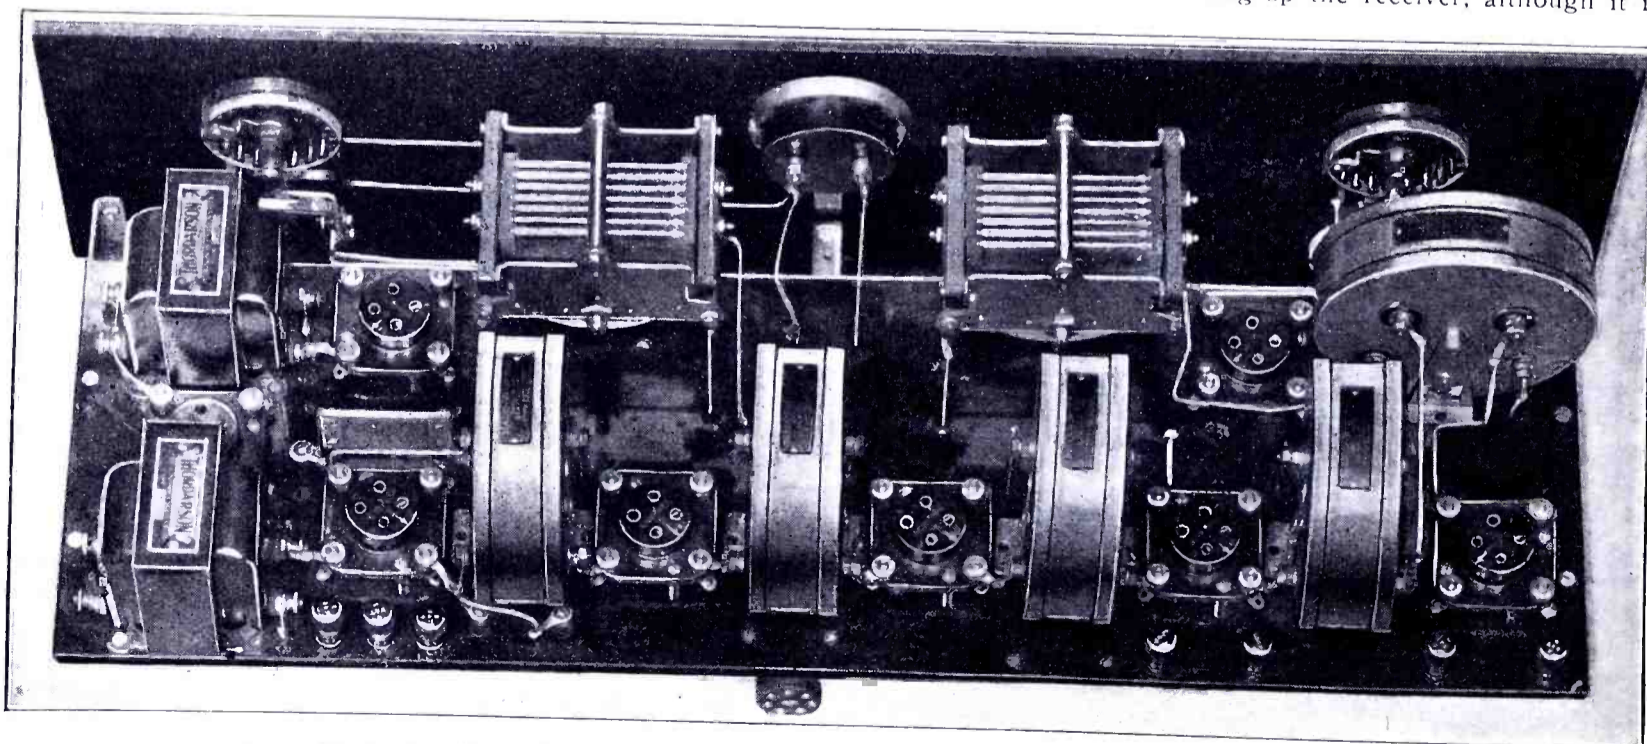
Photo C. Rear view of completed receiver. Notice the neat arrangement of parts
